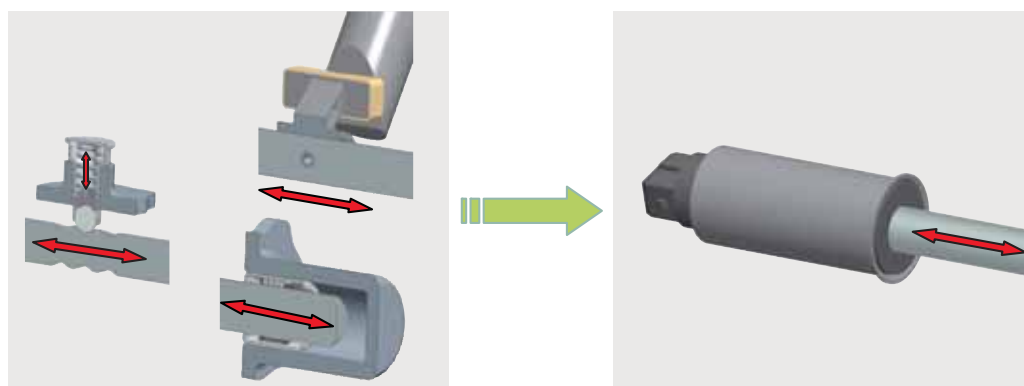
Sensor bearing: Bearing with integrated position sensor and detent function
